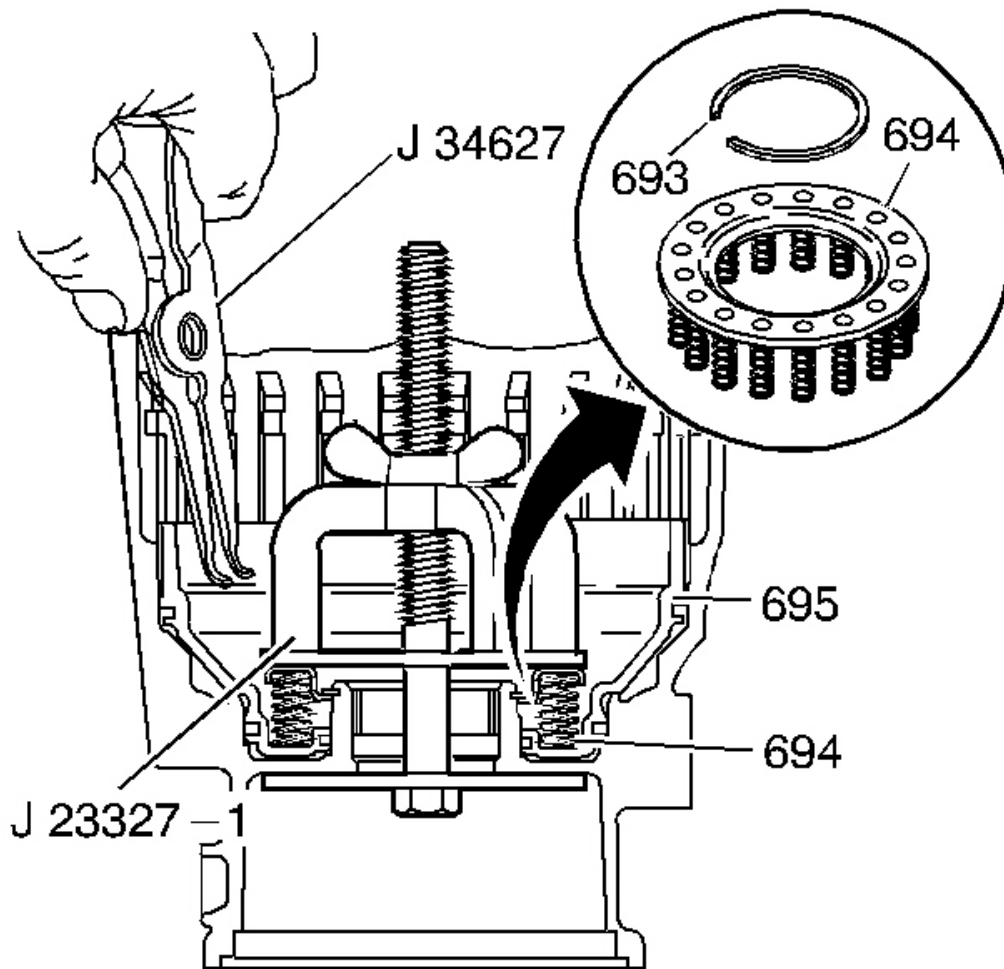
View Of Low And Reverse Clutch Spring Assembly & Retainer Ring
